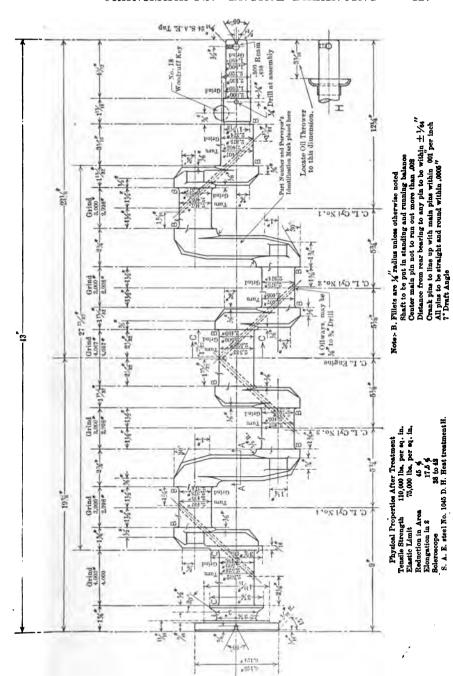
Three-bearing crankshaft of Class B Military Truck engine (4%" × 6").
